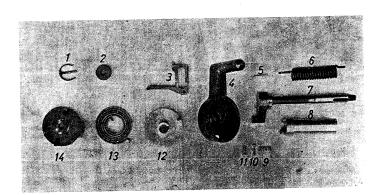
SEMIAUTOMATIC MECHANISM PARTS
